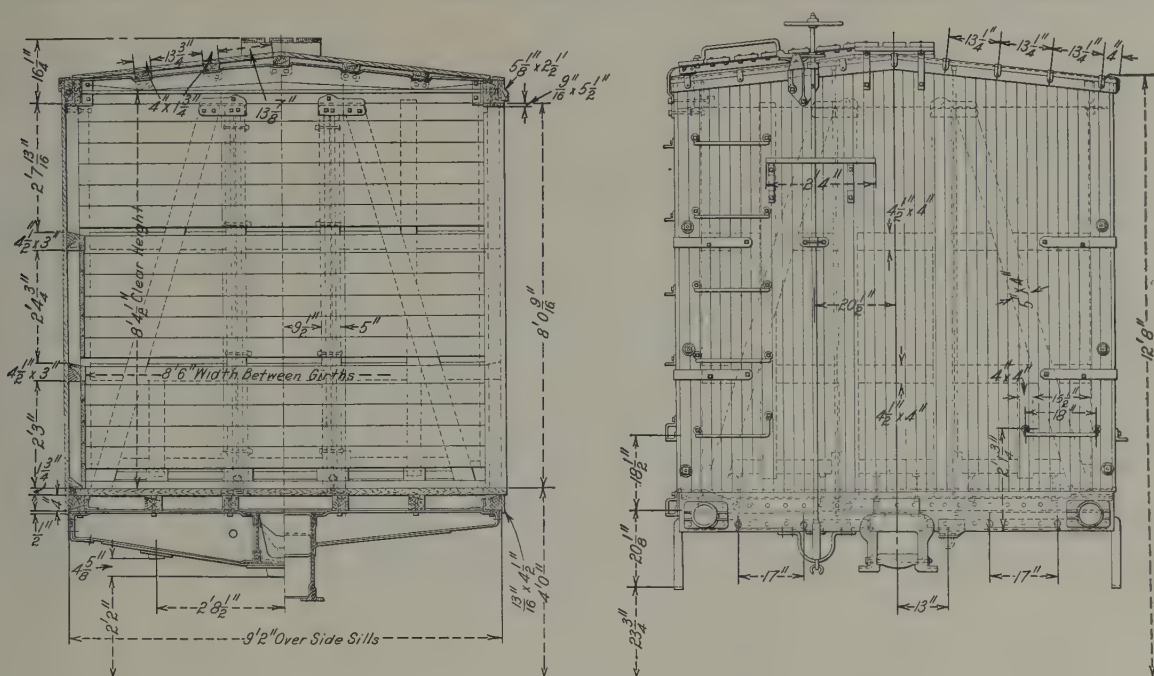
End Elevation and Cross Sections of New York Central Steel Underframe Box Car Shown in Fig. 36.
